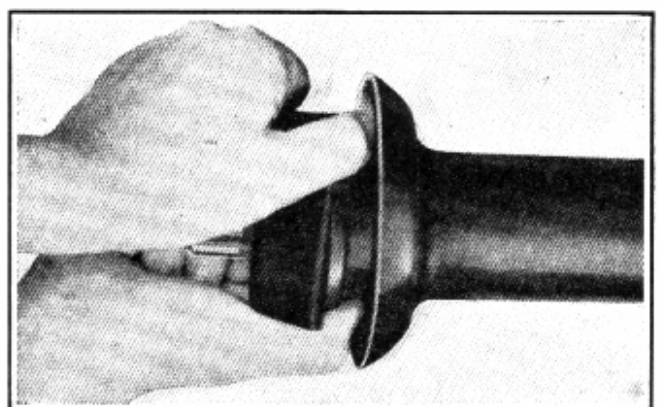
Removing or Replacing Bearing Rubber Cushion
